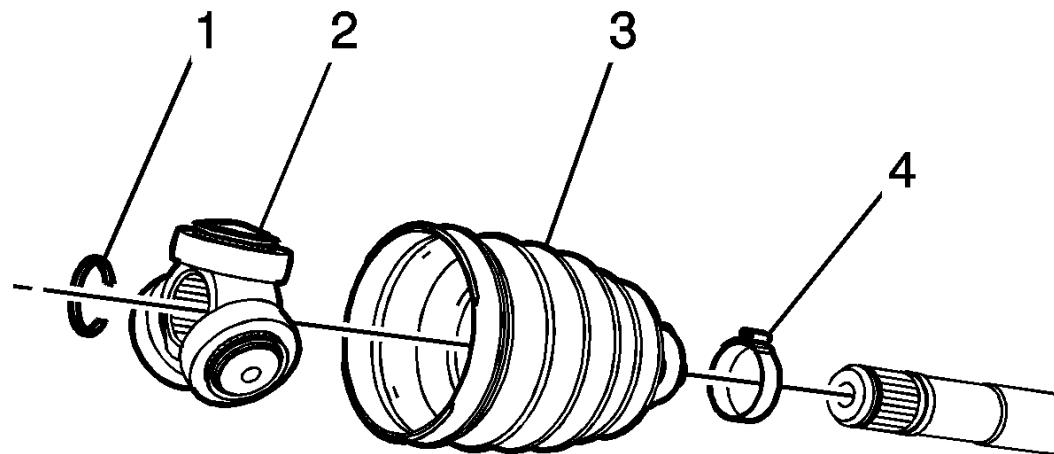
View Of Spider Assembly, Boot & Retaining Ring
